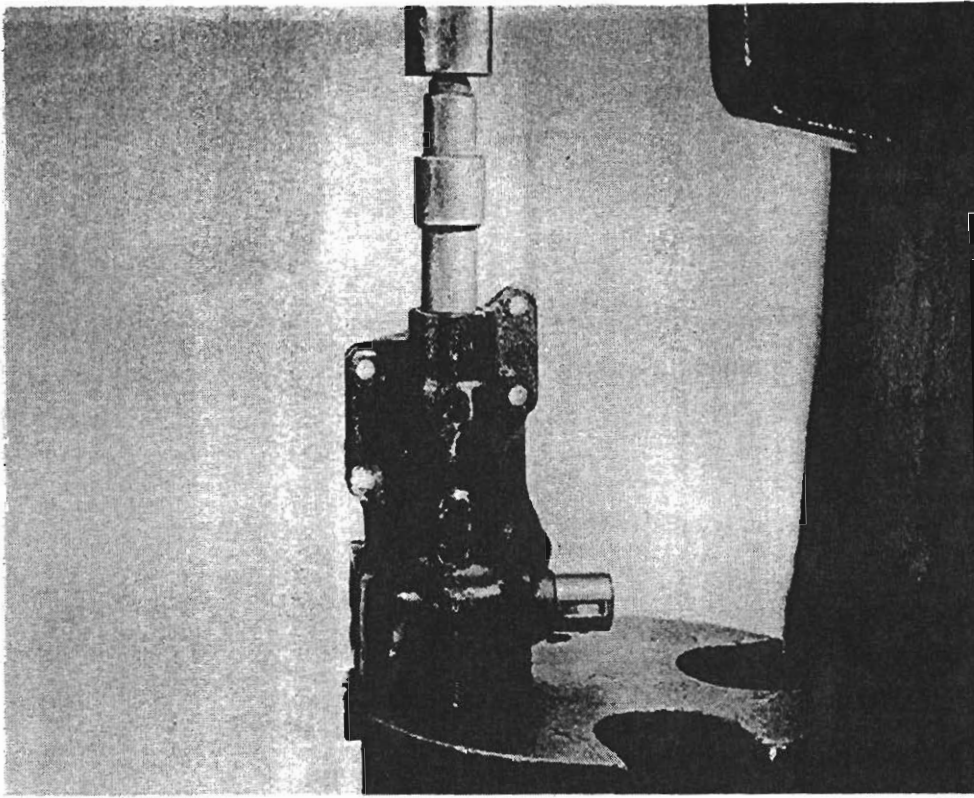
Thick-Walled Bushings May Be Pressed Out of the Case Using the Remover and Replacer J-2551-1.
